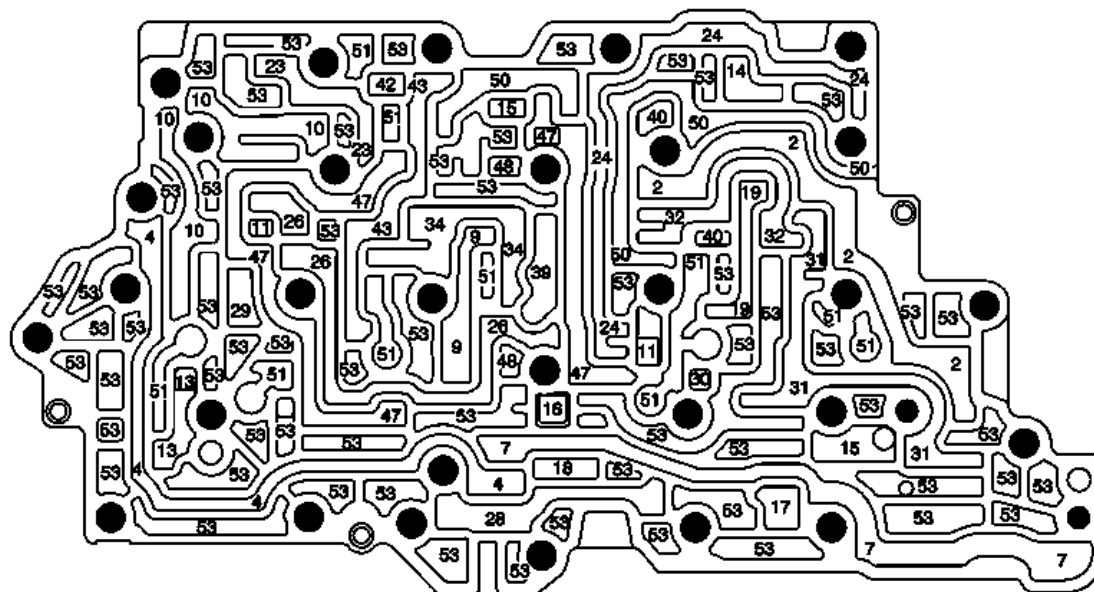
Control Valve Channel Plate - Upper Body Spacer Plate Side
